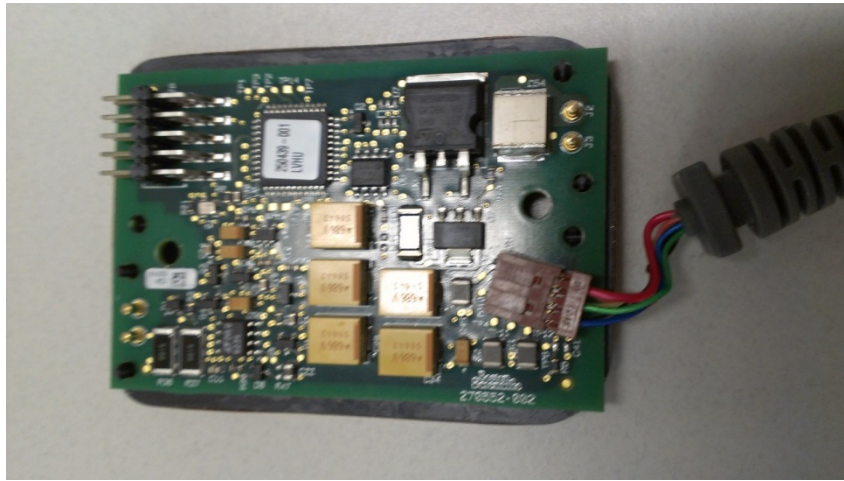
Wand Printed Circuit Assembly – Bottom Side (for reference only)
